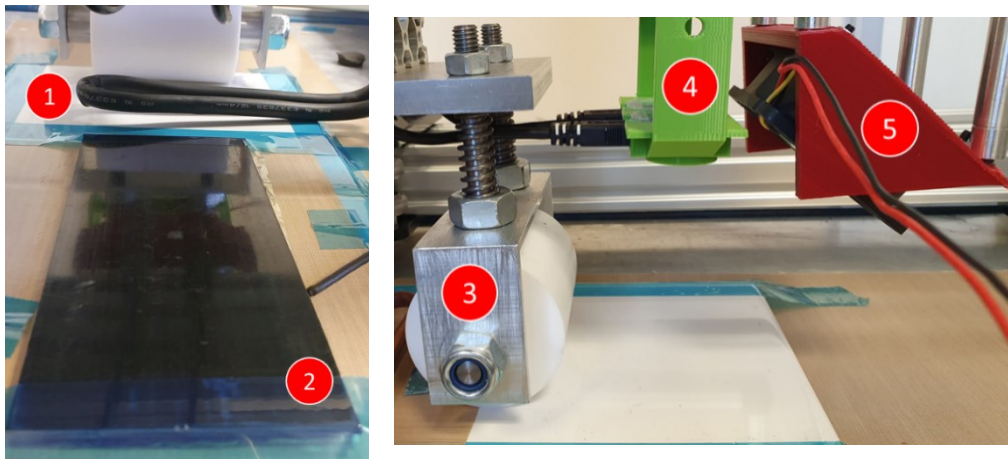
Welding system: induction heating coil (1); PA6-Ti sample (2); PTFE pressure roller (3); rear IR cameras (4); cooling fan (5) [30]
